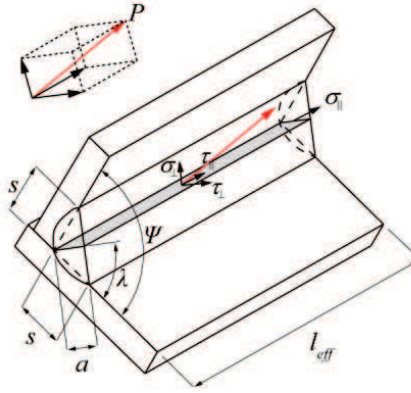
Stress components acting on the plane of the weld throat; weld cross-sectional dimensions.
